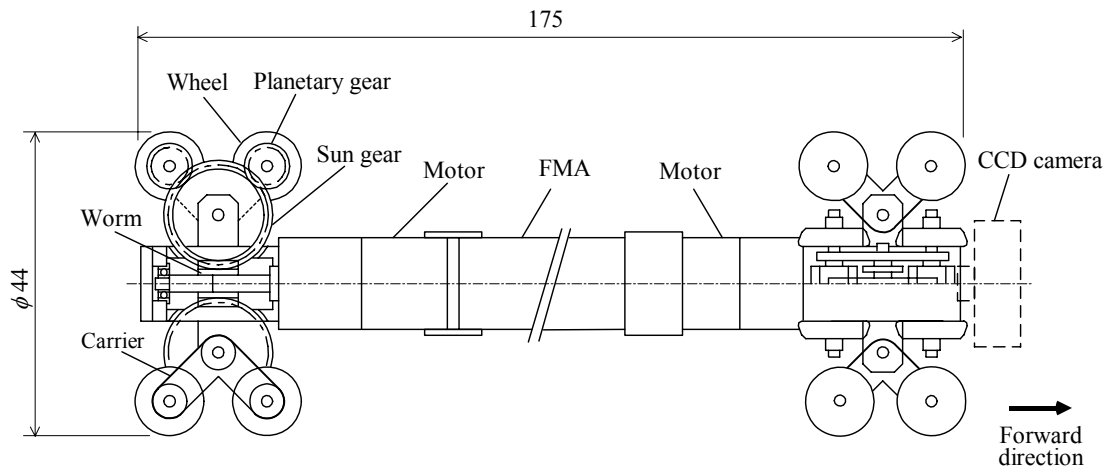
Cross-sectional view of the in-pipe mobile robot for 2-inch pipes
